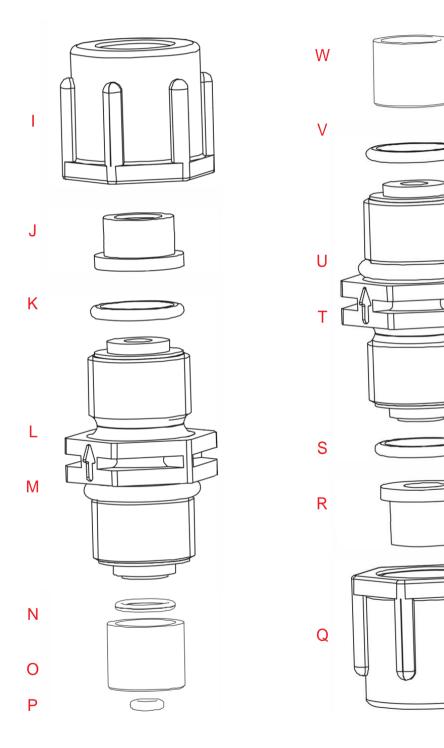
Assembly drawing of the outlet valves (above pump head) and the inlet valves (below pump head).
